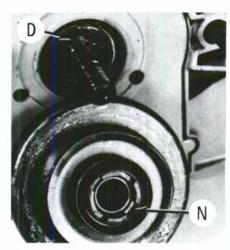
Dogs (D) on oil pump drive gear must mesh with notches (N) on clutch drum.
